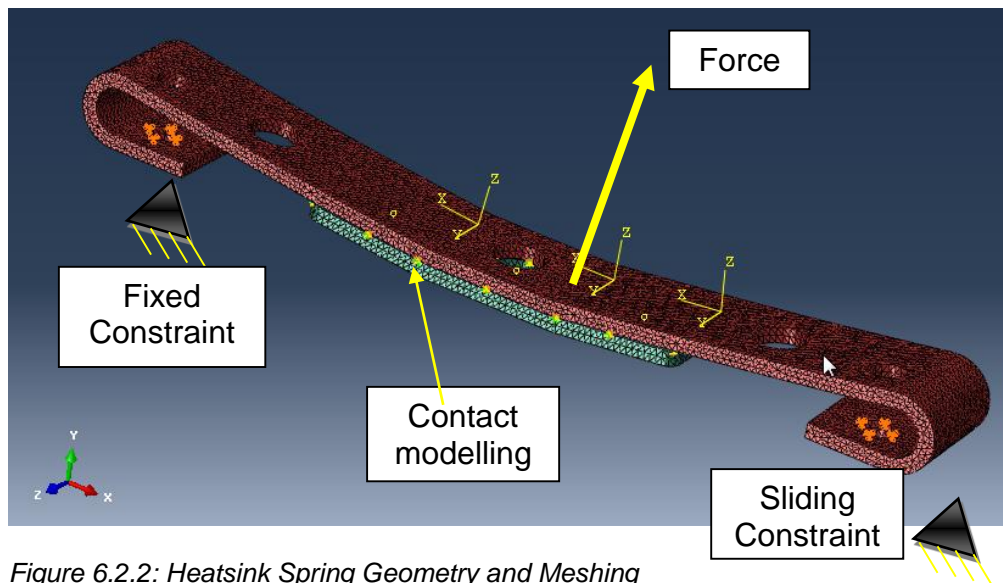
Heatsink Spring Geometry and Meshing
